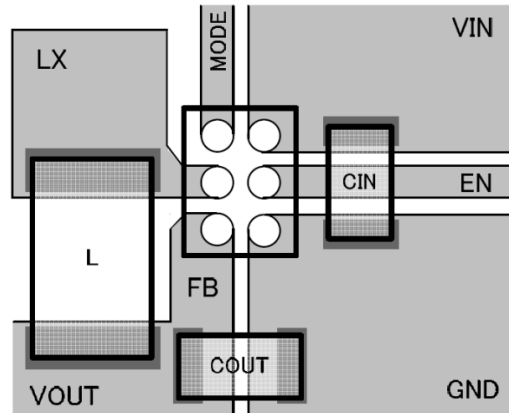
BU90005GWZ-E2EVK-101 PCB Layout
